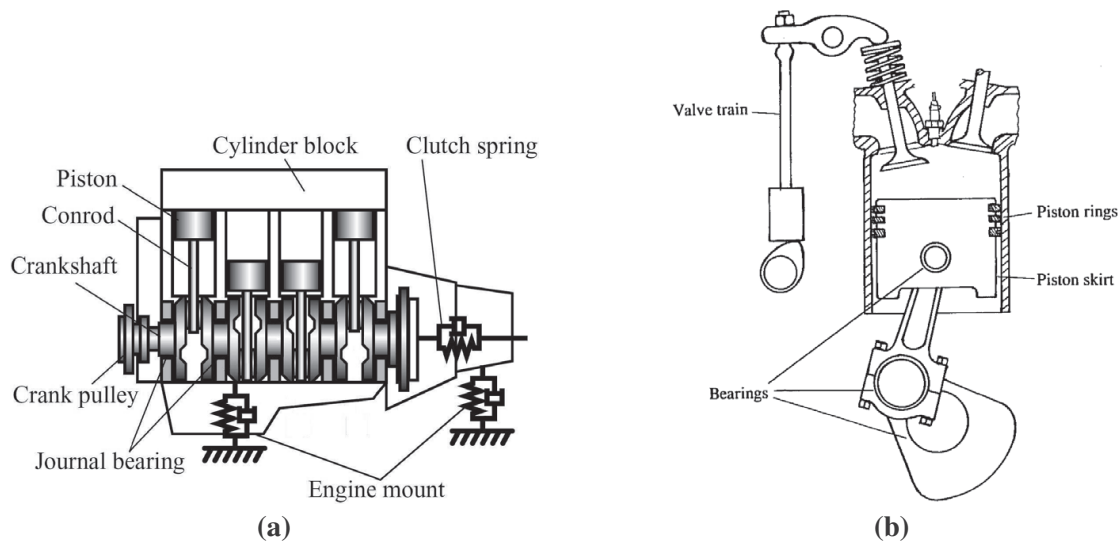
(a) Main parts of an internal combustion engine; (b) Principal friction contributors in a reciprocating engine (Ciulli, 1992).
